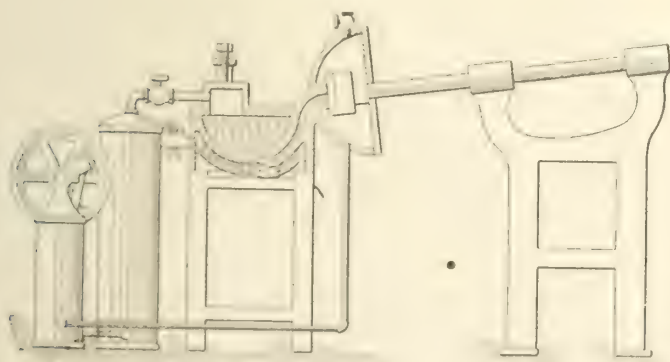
MACHINE WITH DIE ENCLOSED IN VACUUM CHAMBER.
